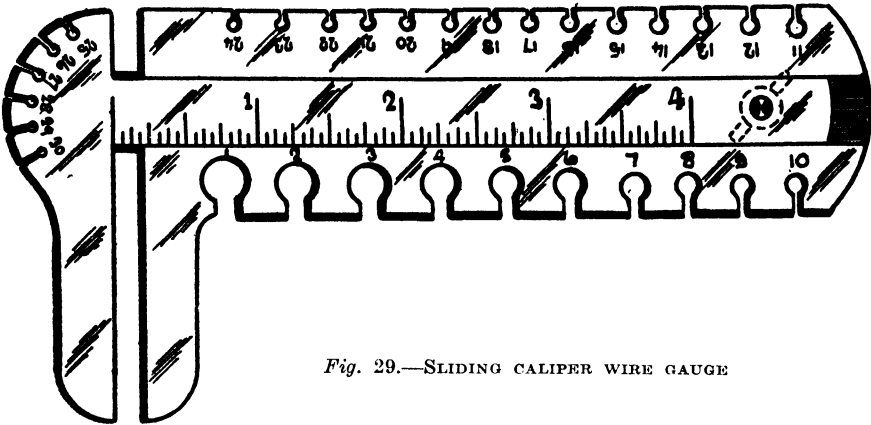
SLIDING CALIPER WIRE GAUGE
